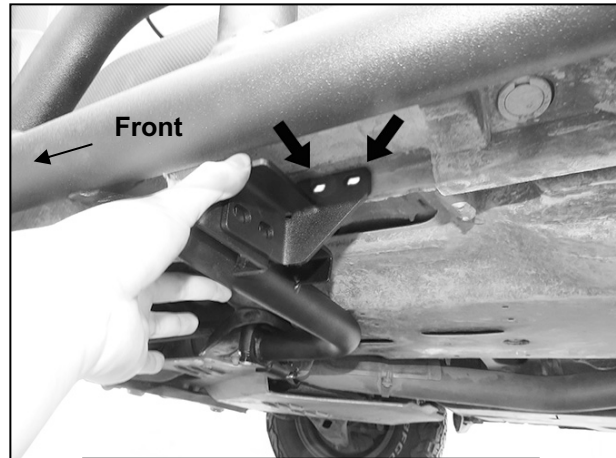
Attach driver/left front Support Bracket to front end of Rocker Slider
